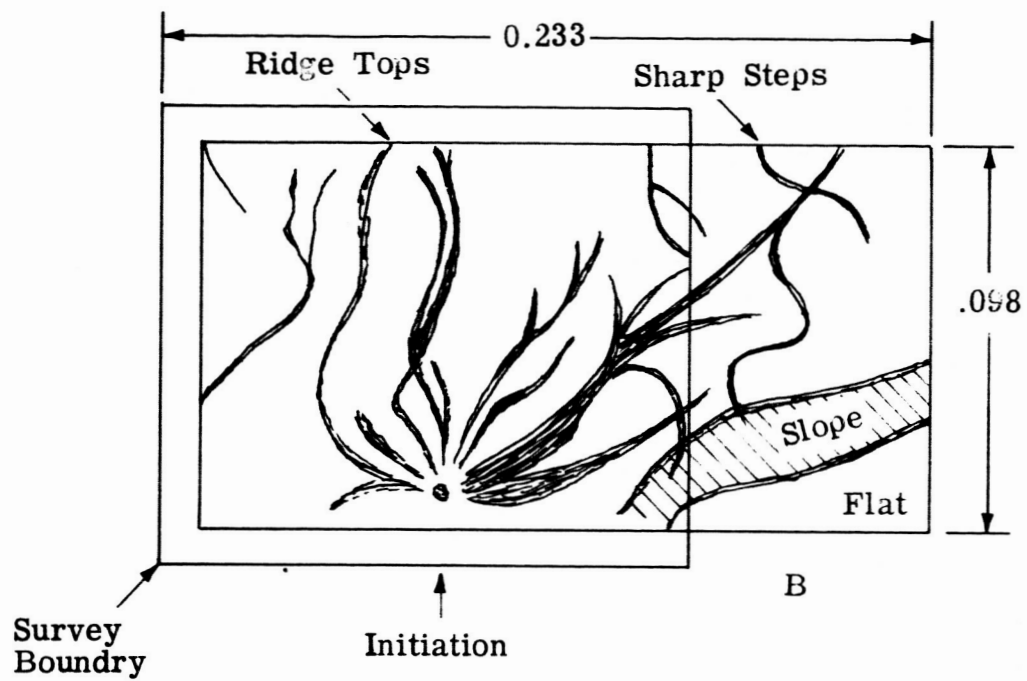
(CONT.) SAMPLE FUSED (CRYSTAL) AND EXTRUDED MgO FRACTURE (B) SKETCH OF FRACTURE SURFACE (C) PHOTO OF PROBABLE ORIGIN.
